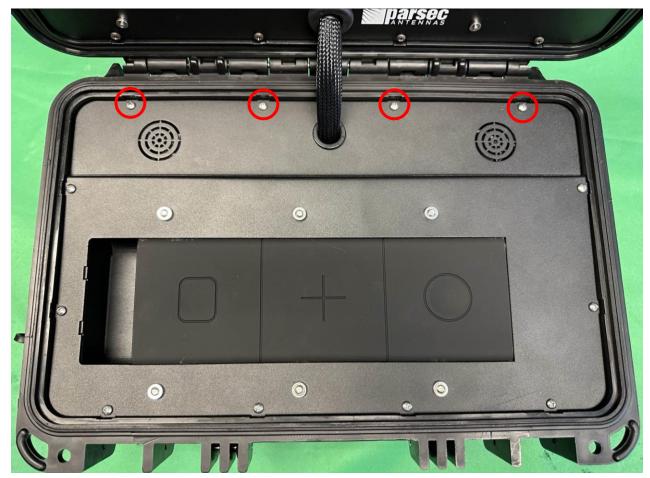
Fasten the cover plate to the case using PTA0071 screws.
